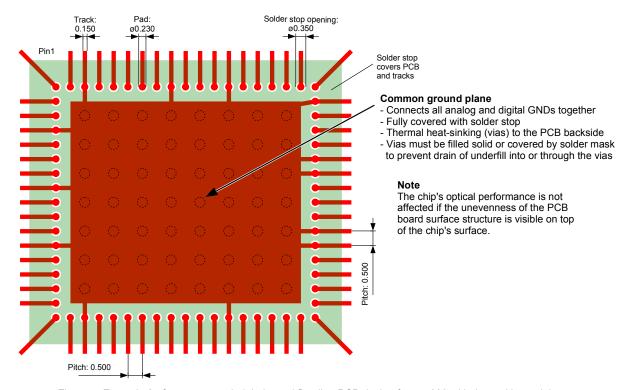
Example 2 of a recommended, balanced fine-line PCB design for epc660 with thermal heat-sink (dimensions in mm)
